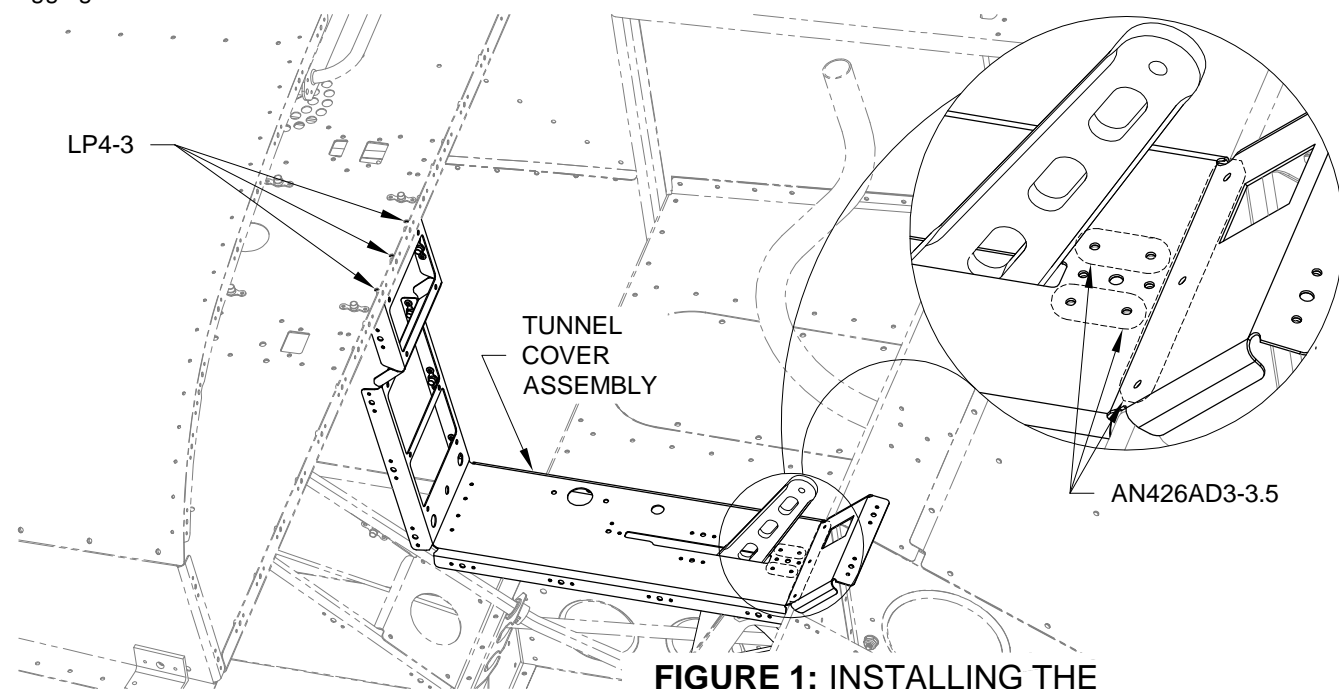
INSTALLING THE TUNNEL COVER ASSEMBLY
